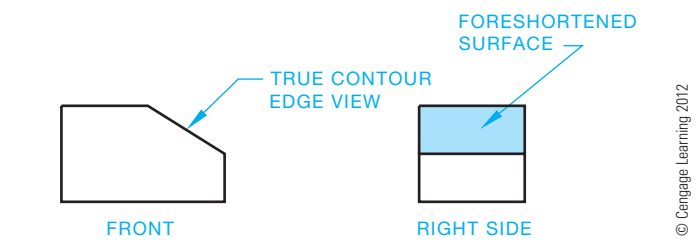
Contour representation. The slanted surface is a true edge in the front view and a foreshortened surface in the right-side view.
